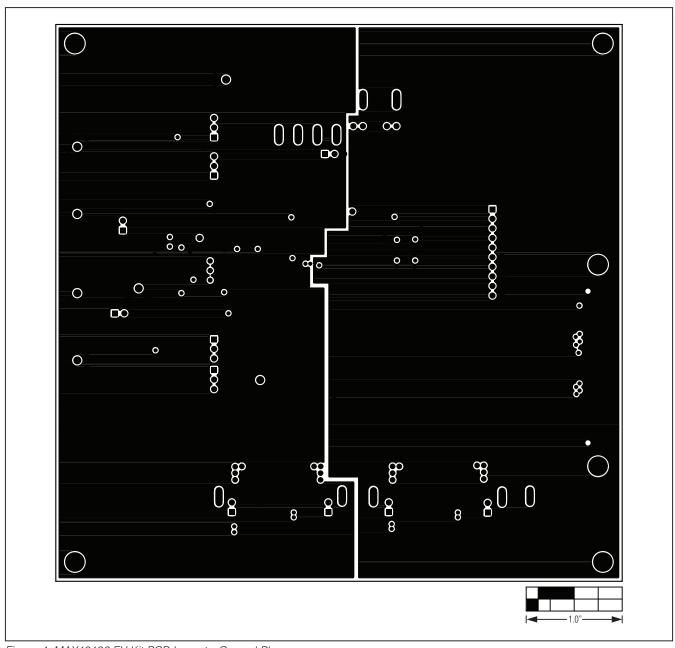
MAX19192 EV Kit PCB Layout—Ground Planes
